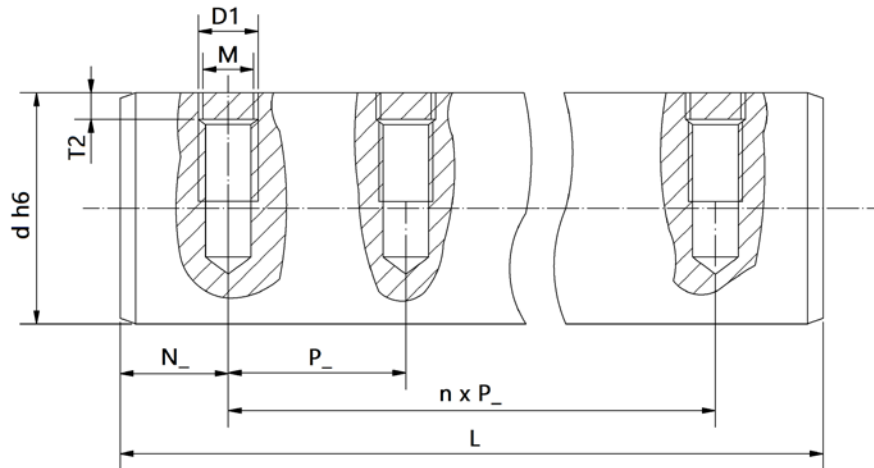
Shafts with radial threads for mounting on shaft supports
